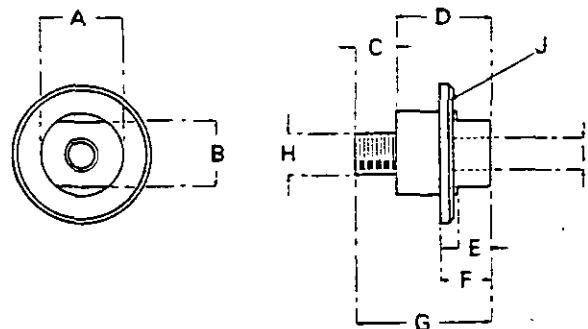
TOOL FOR REPLACING DIFFERENTIAL LOCK SLEEVE
